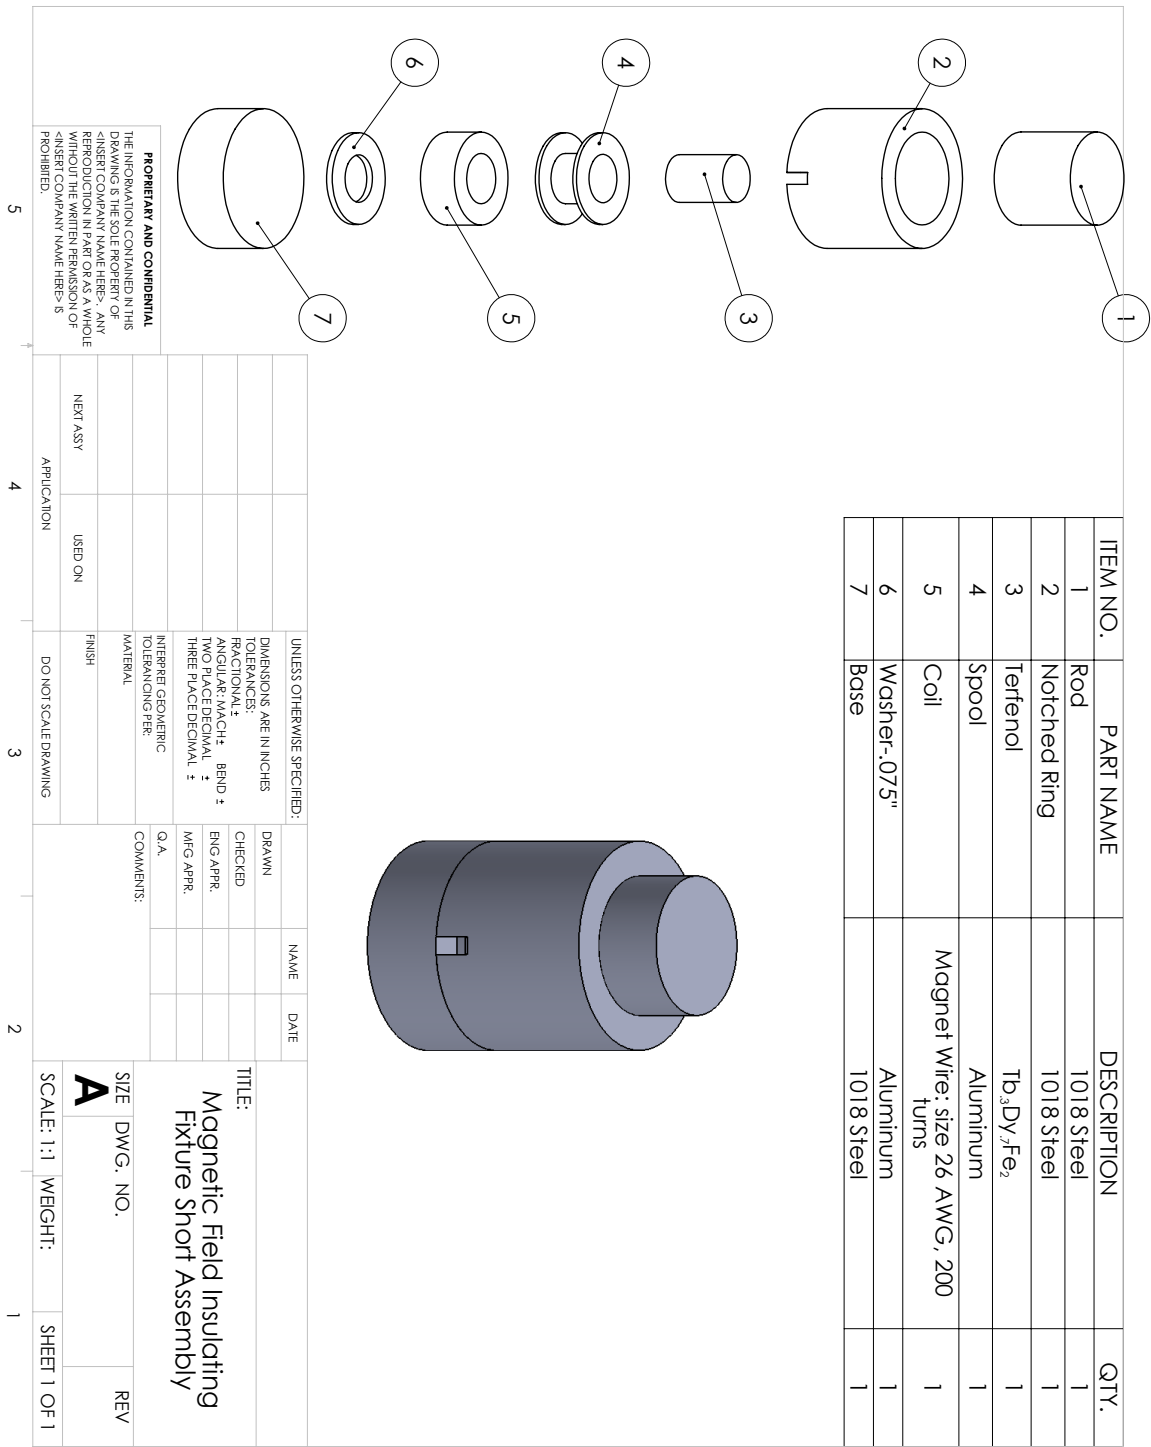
Magnetic Field Insulating Fixture Physical Model
